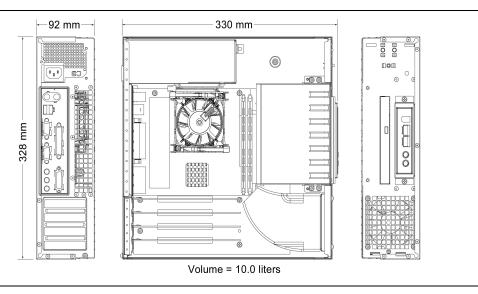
10-Liter Reference Chassis Design Layout, Front Duct
